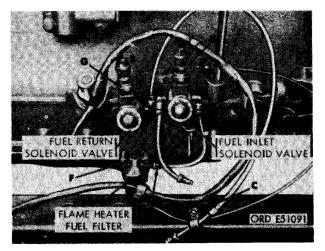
DISCONNECTING OR CONNECT-ING FLAME HEATER FUEL TUBES AND HARNESS AT SOLENOID VALVES.
